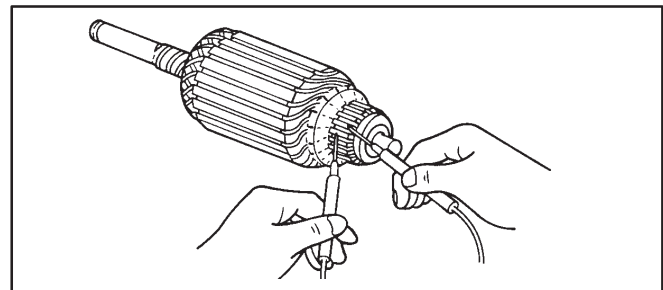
CHECKING ARMATURE WINDINGS
